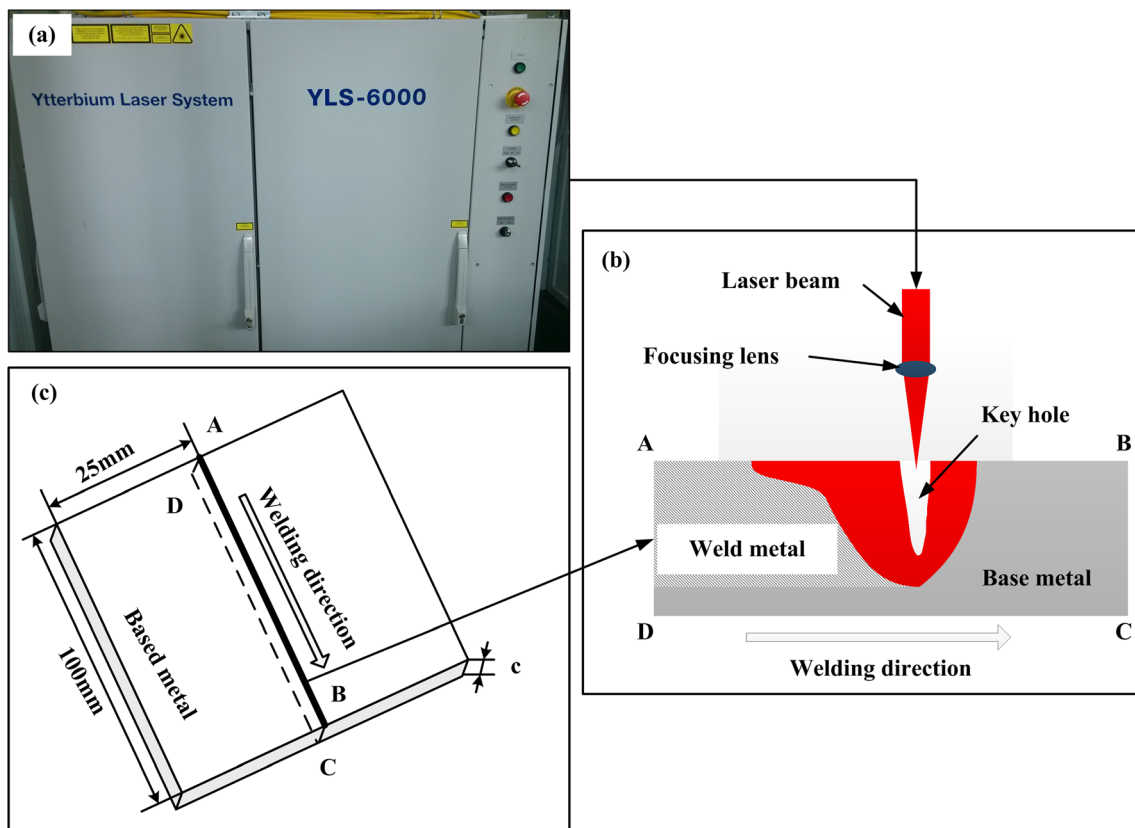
Welding system including a laser device, b schematic illustration for the workpiece, and c welding plates
